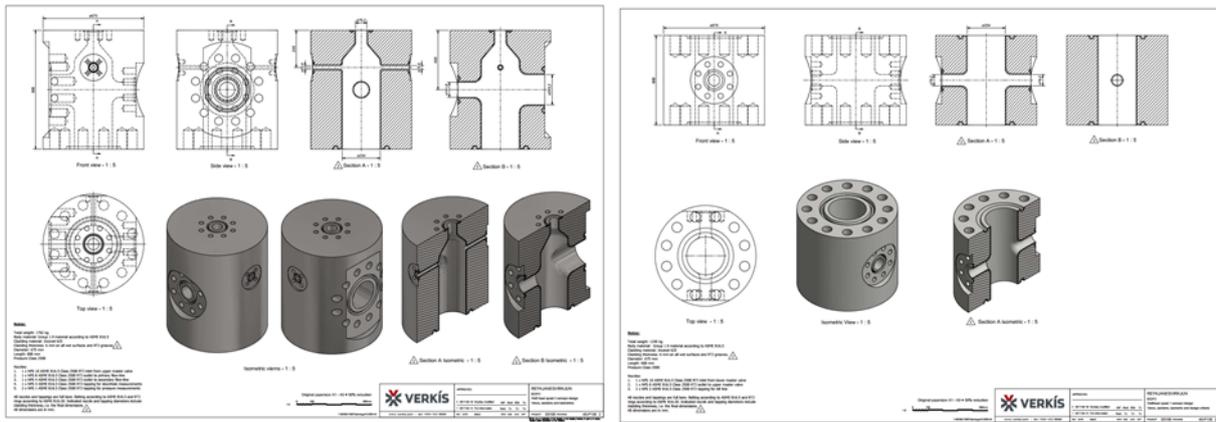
Right: Lower wellhead spool intended for kill/bleed valves. Left: Upper wellhead spool.
